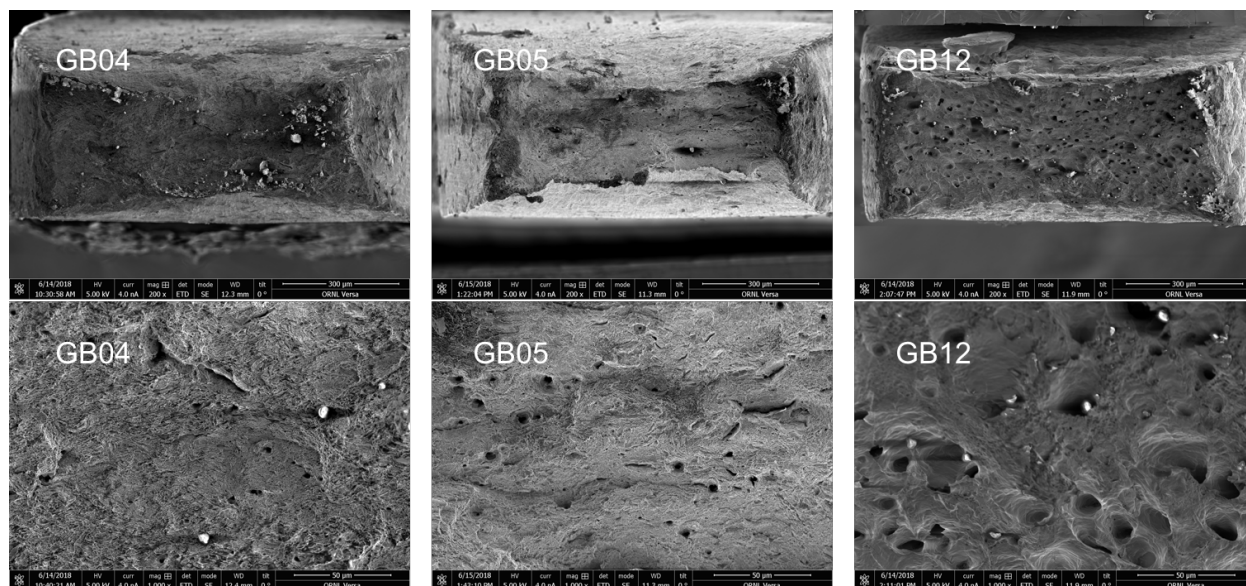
Fractography of the tensile-tested GB04, GB05, and GB12 samples.
